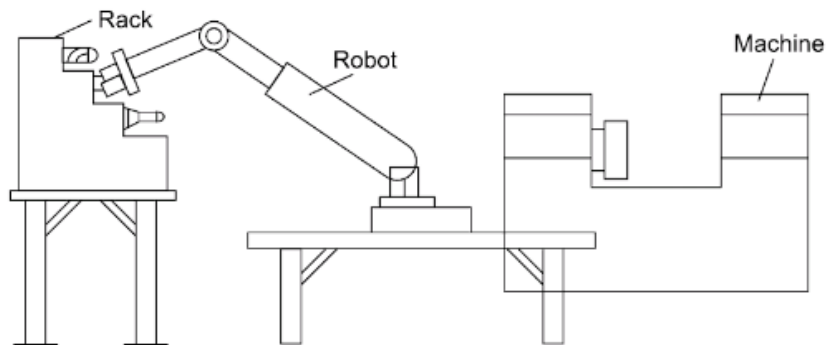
A robot picking a tool from a rack and loading on a machine
